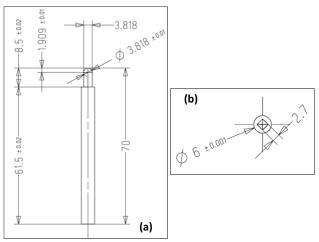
CAD model of the reference artefact with nominal dimensions in mm. (a) Side view, and (b) top view.
